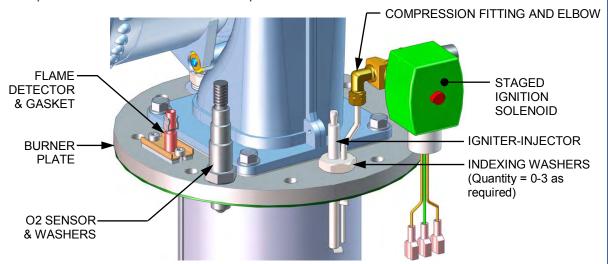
Igniter-Injector & Flame Detector Mounting Details
